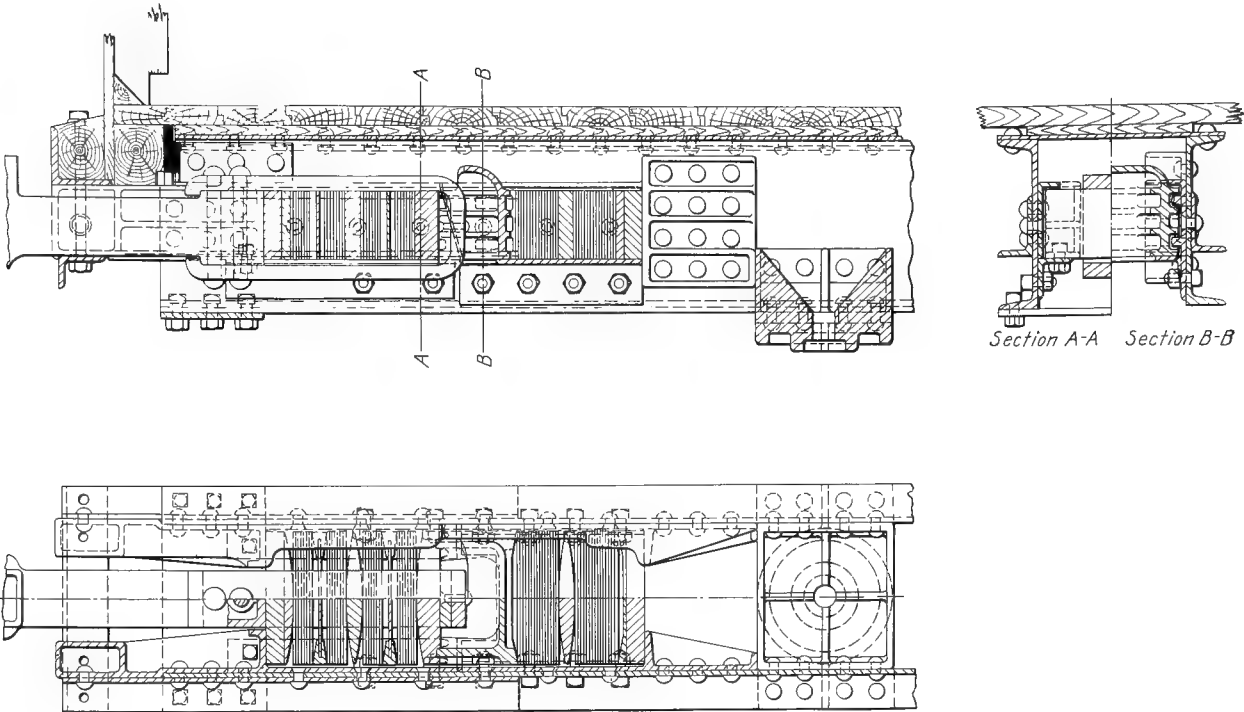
Waugh Auxiliary Buffer in Combination with Waugh Draft Gear.
